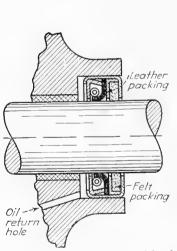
Sometimes felt is used on the dust-exclusion side of the seal in place of leather shown in Figs. 339 and 340. Both sealing materials are retained by spinning the outer casing over the leather clamping cup.
